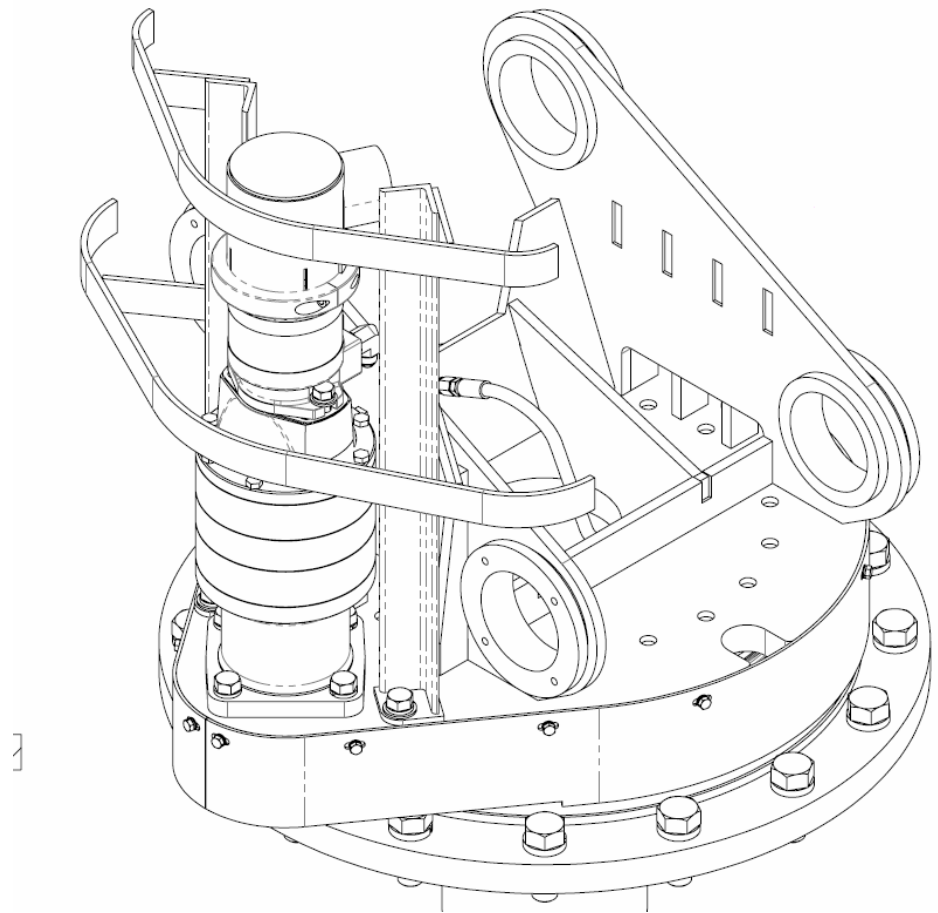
TM-80 Wrench with Cable Guide/Encoder Guard Installed
